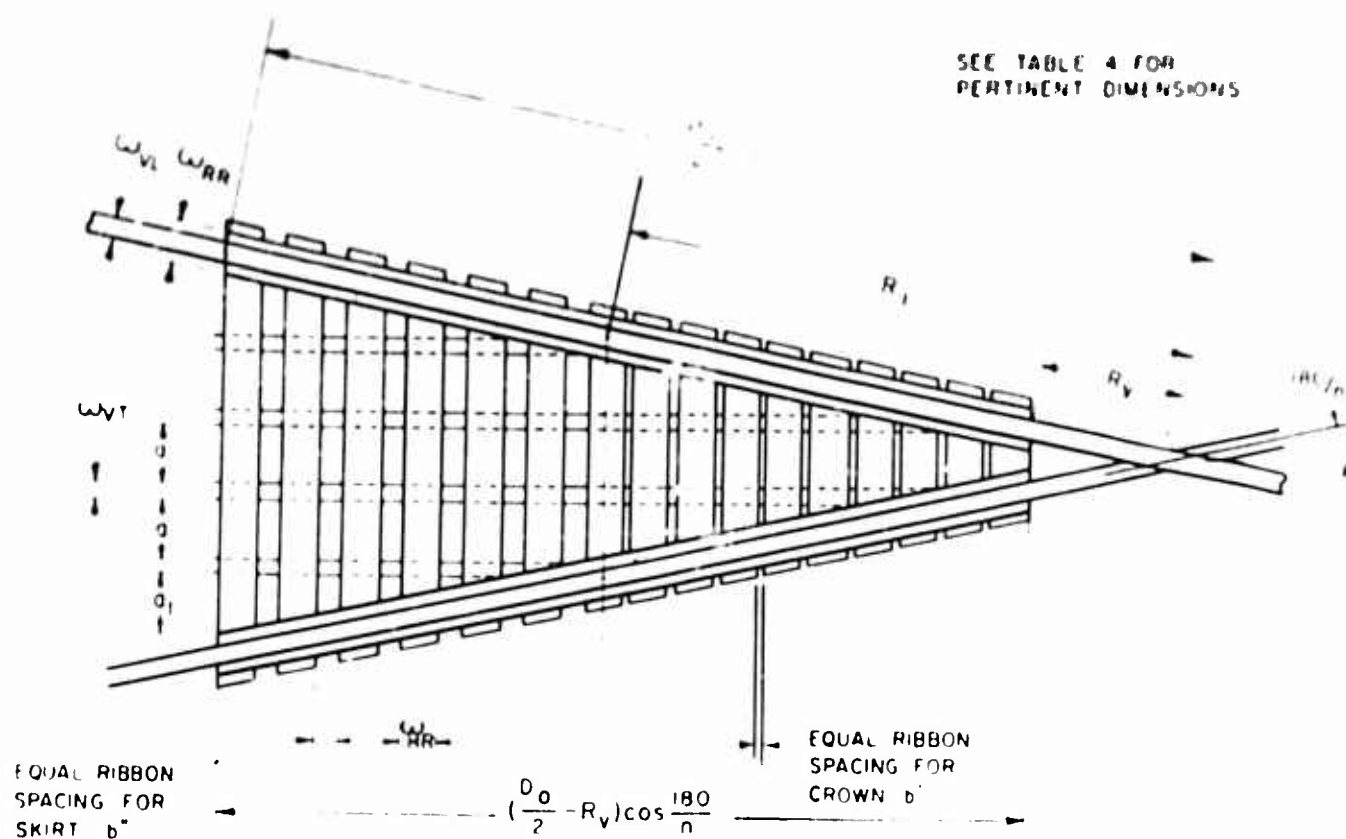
Typical Gore Layout - FIST Ribbon Parachute
